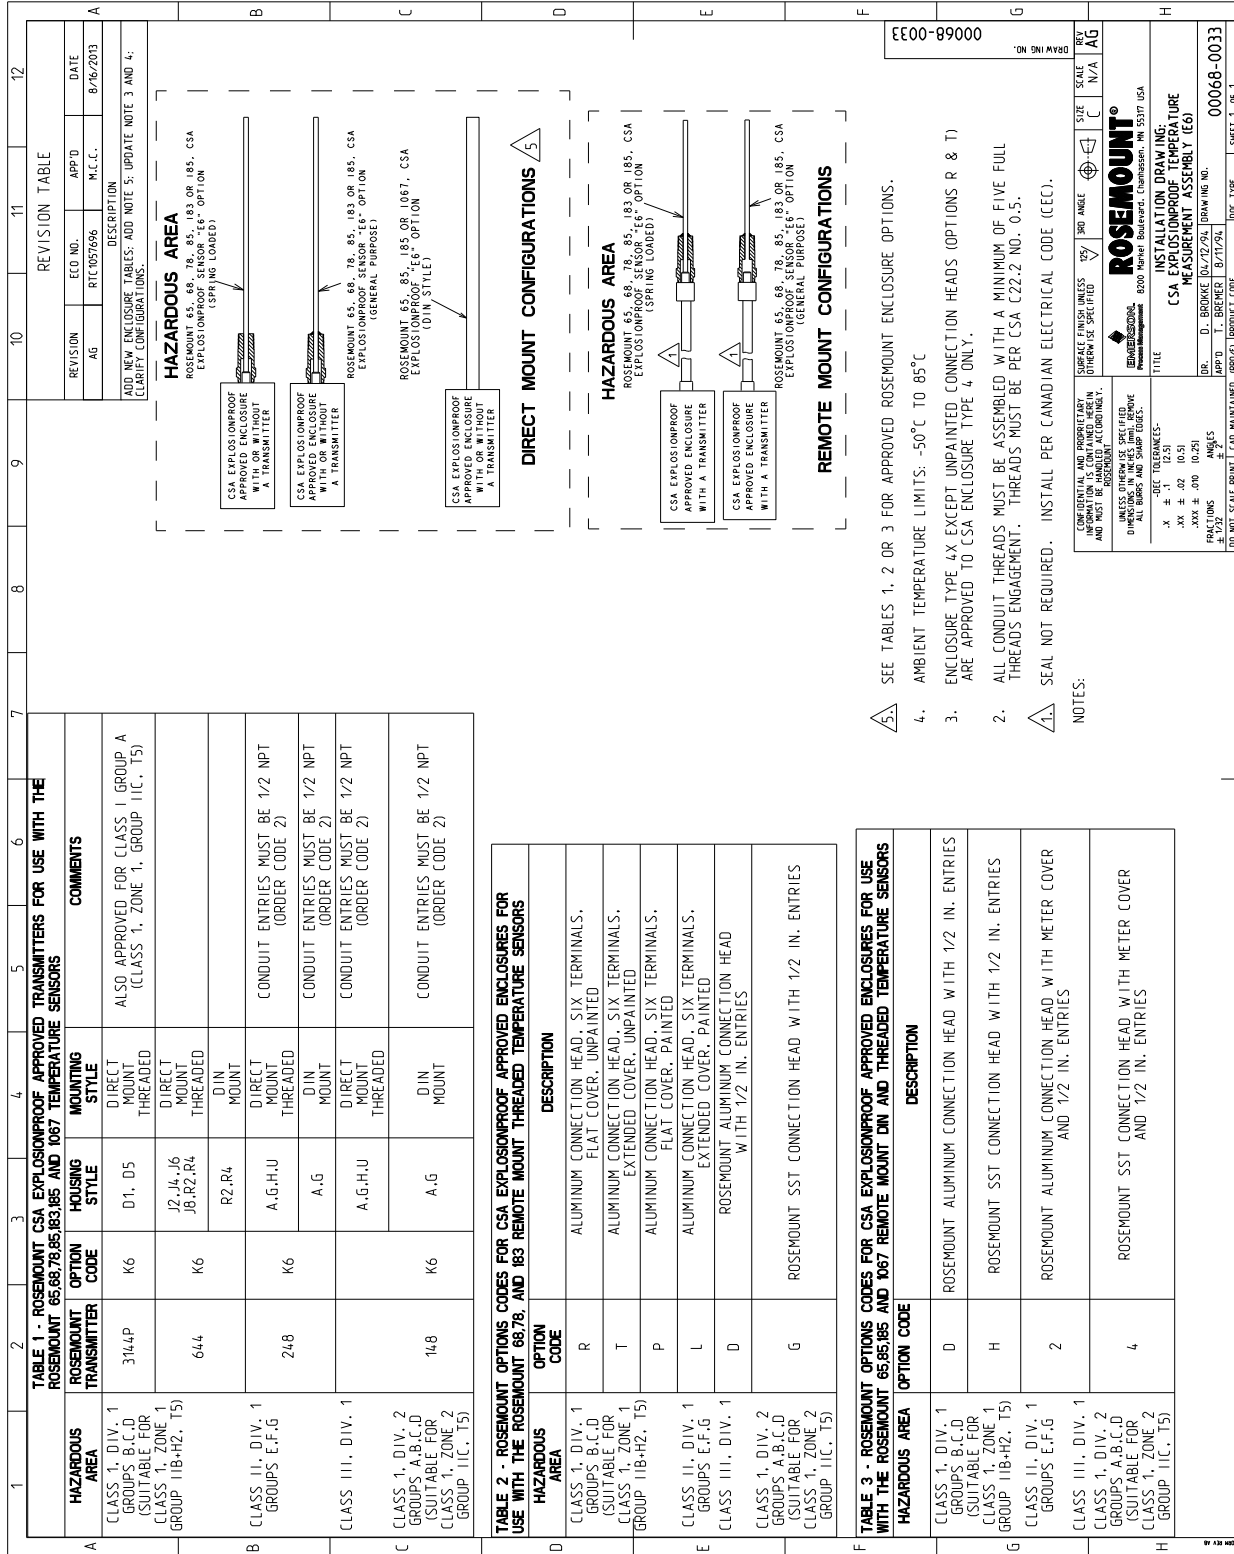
CSA Explosionproof Temperature Measurement Assembly (E6) 00068-0033, Rev AG
